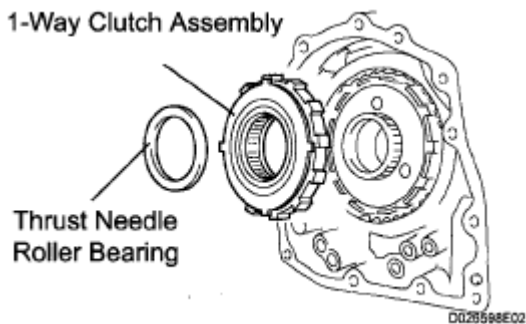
Identifying 1-Way Clutch Assembly And Thrust Needle Roller Bearing
